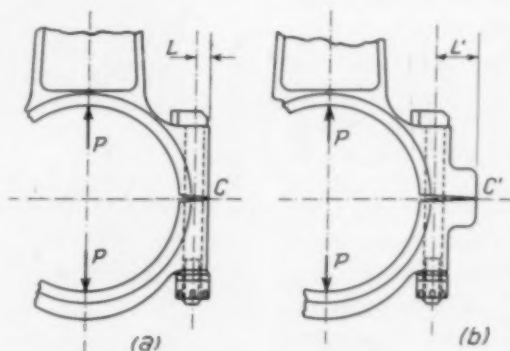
Fatigue Failure of Bolt Due to Elastic Changes in Bolted Member Cured by Increasing the Effective Length  $L'$ , to the Right
